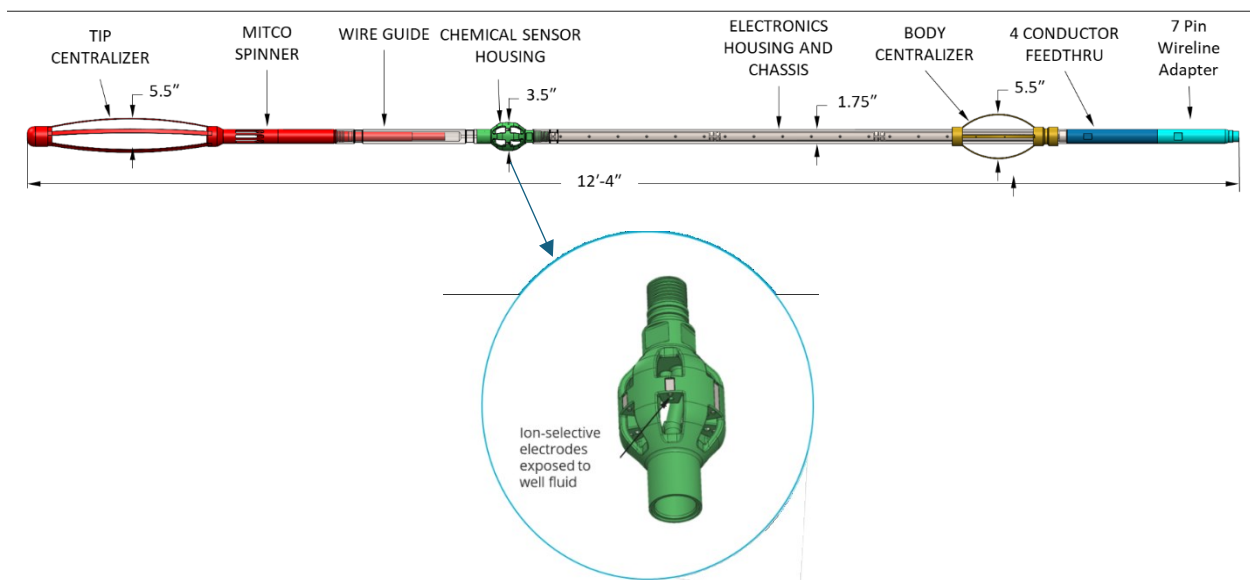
wireline tool assembly diagram deployed at well 58-32.
